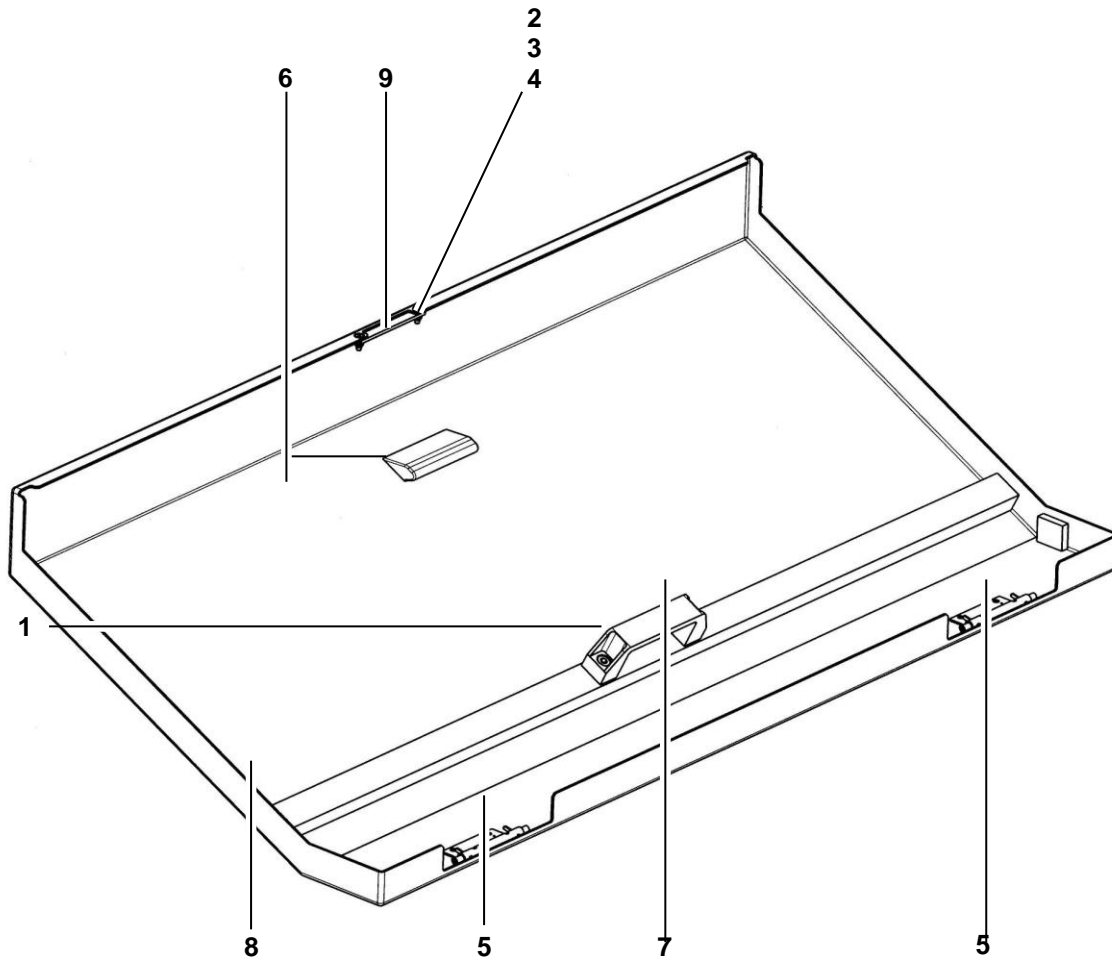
CONTROL PANEL ACCESS DOOR ASSY
